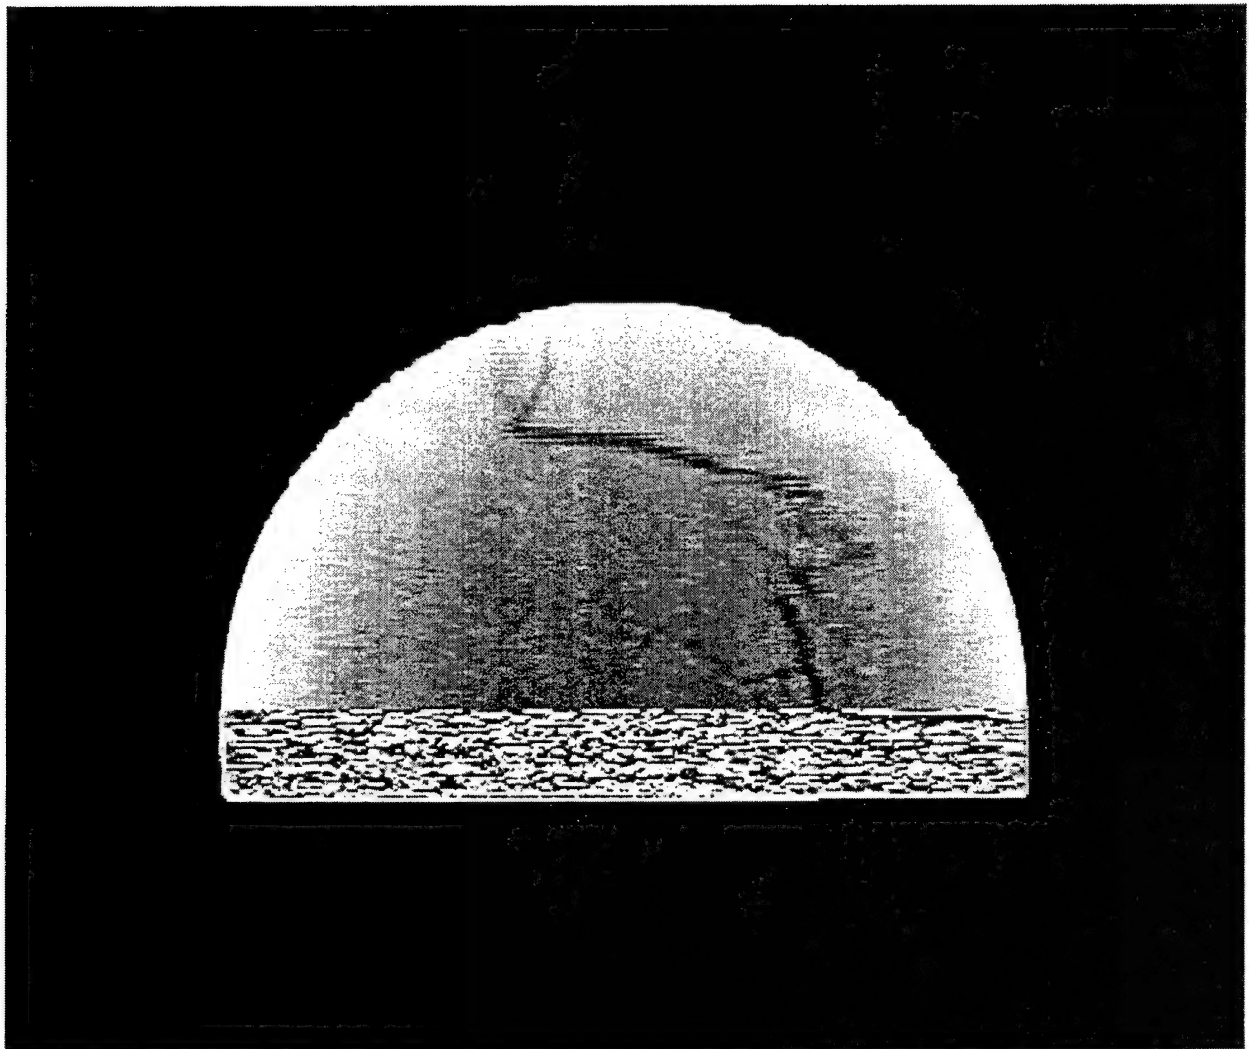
17.25 mm from bottom of disk with 65° rotation about X-axis.
